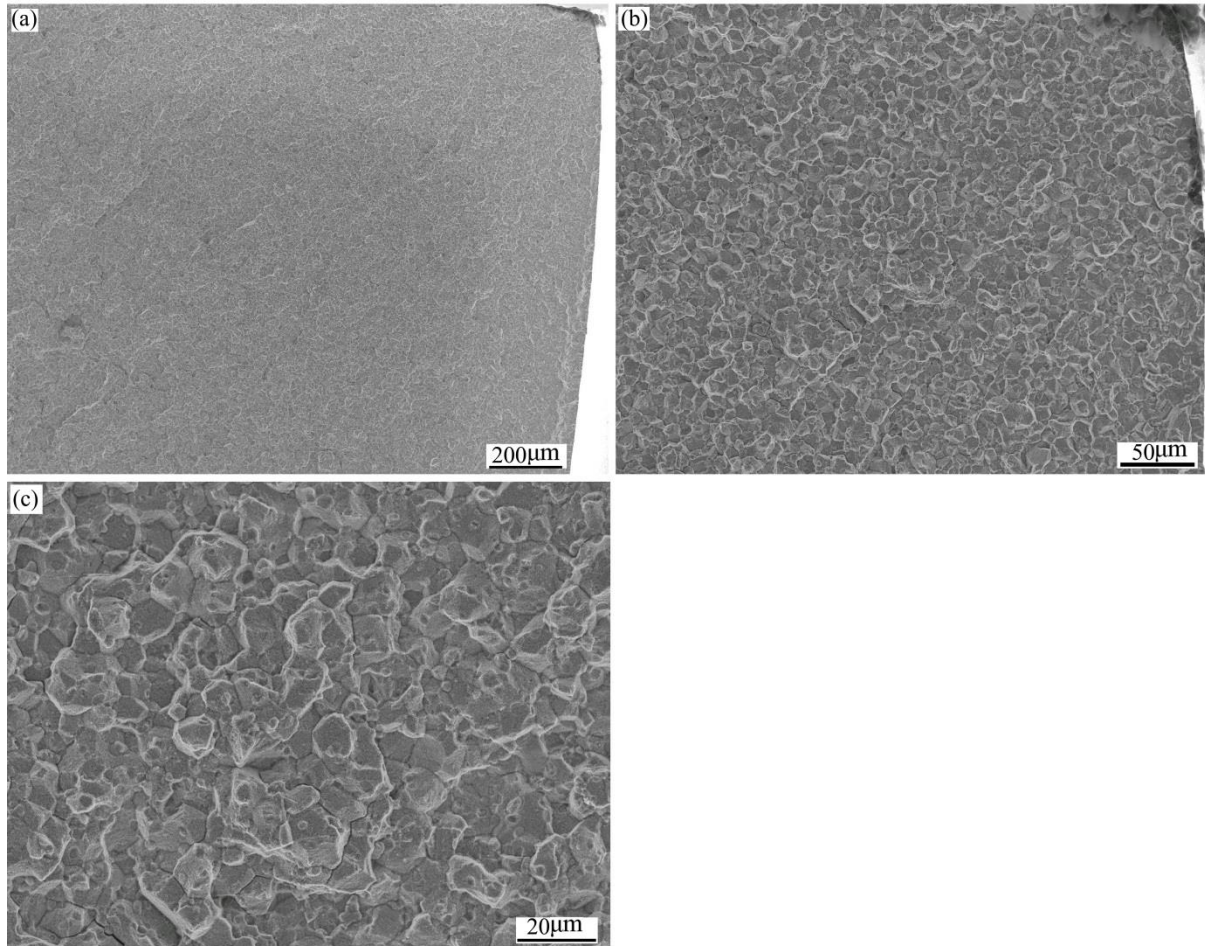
Fractography of the FG LSHR alloy tested at 650 °C in air: (a) overall view of the fracture surface; (b) completely intergranular fracture surface; and (c) higher magnification of the intergranular fracture surface.
